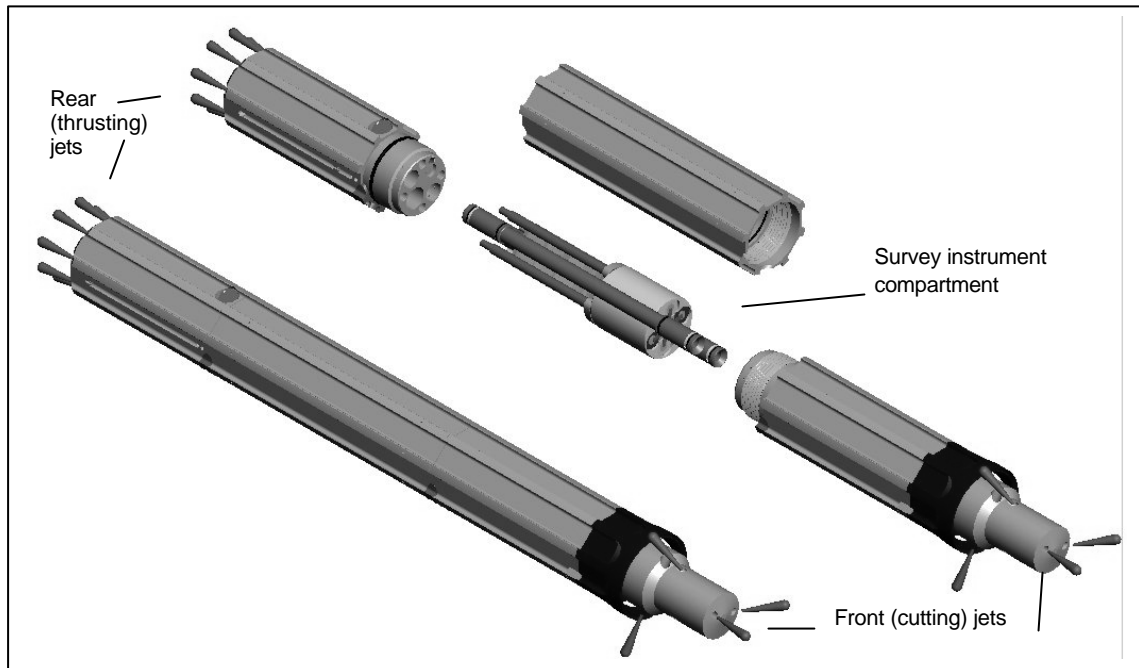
CMTE's water powered drilling tool assembled view (lower figure) and exploded view (upper figure)
